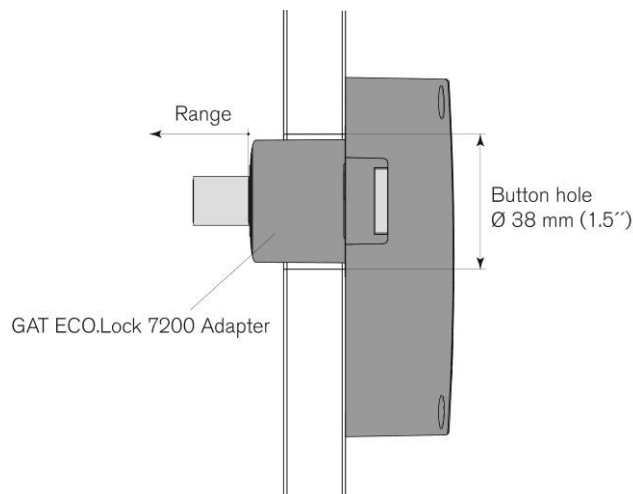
Diameter of the button drill hole for metallic doors and mounting the GAT ECO.Lock 7200 Adapter
